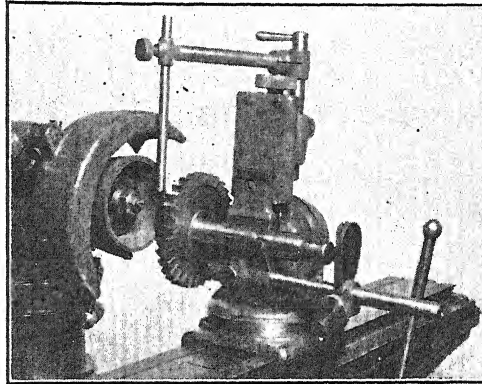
A Setup on the Norton Universal Tool and Cutter Grinder for Grinding the Side Land of a Side Milling Cutter.
